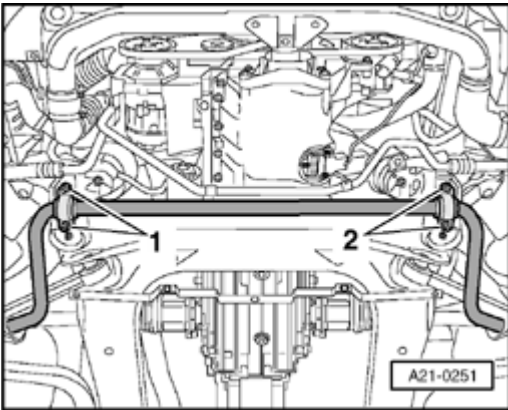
Removing Bolts For Left And Right Stabilizer Bar Mount
